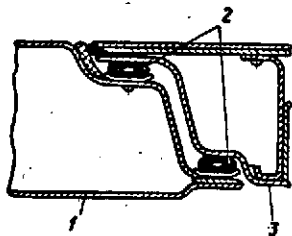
Sealing of the access doors of the I-18 aircraft with rubber sections without using a seal:
